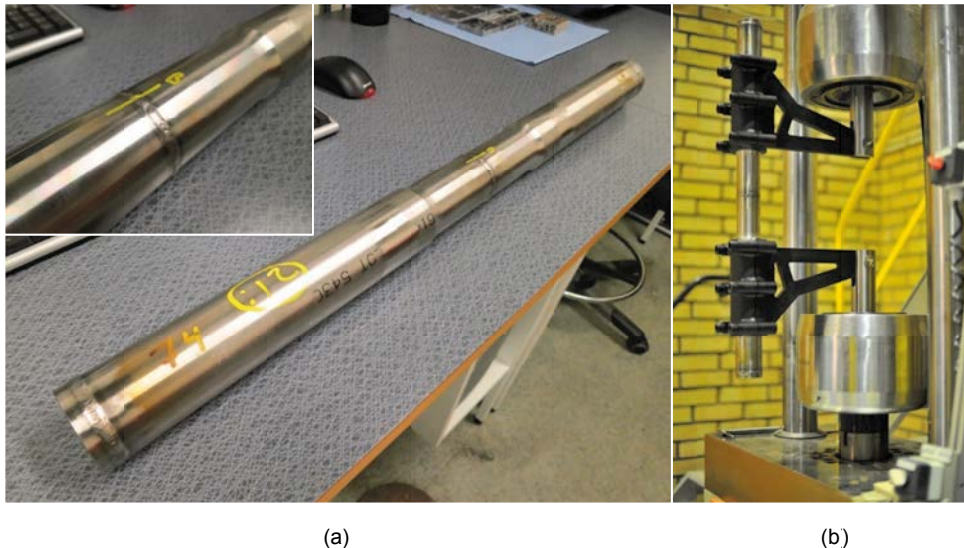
(a) Welded piping component with close-up view of the circumferential butt weld in as-welded condition. (b) Actual mounted test specimen in servo-hydraulic testing machine.
